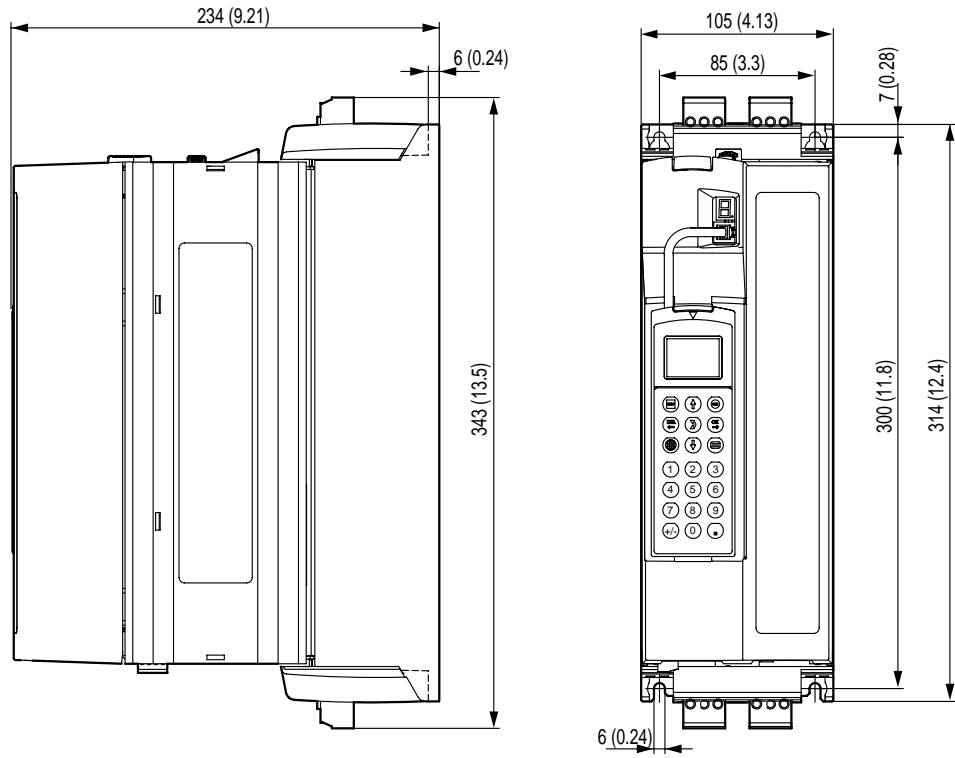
Dimensions for MDX61B size 1, dimensions in mm (in)
